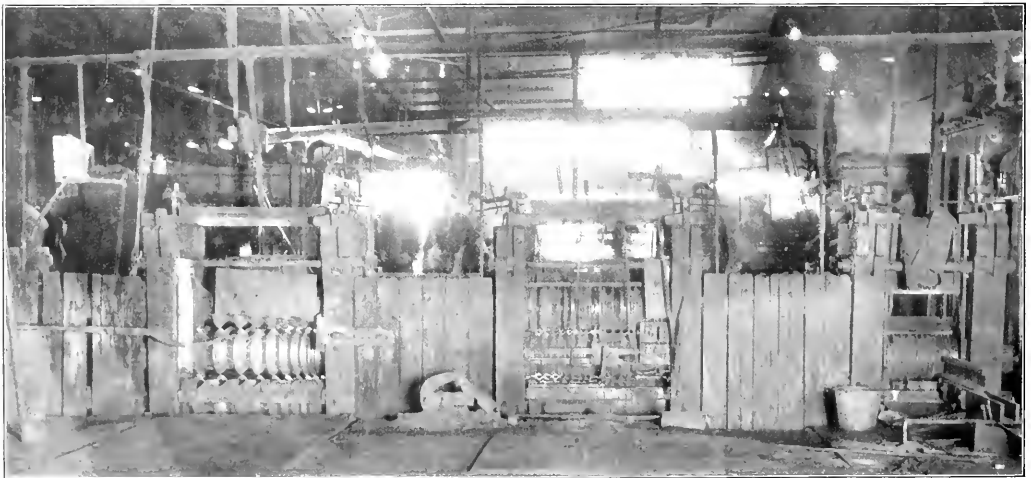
Rear View of the Rolling Mill; Roughing Rolls on the Left
